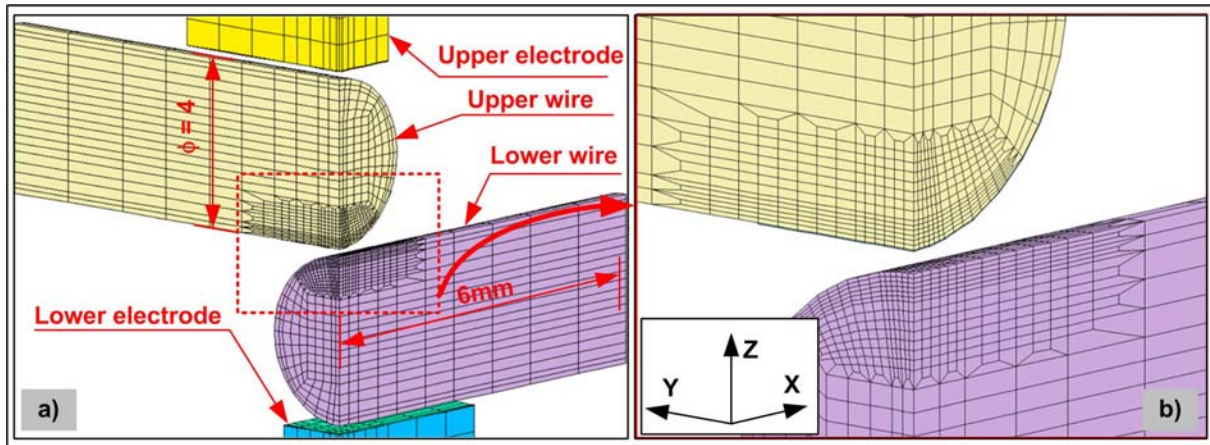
Geometry of the 3D model of cross wire welding (Al 5182).
